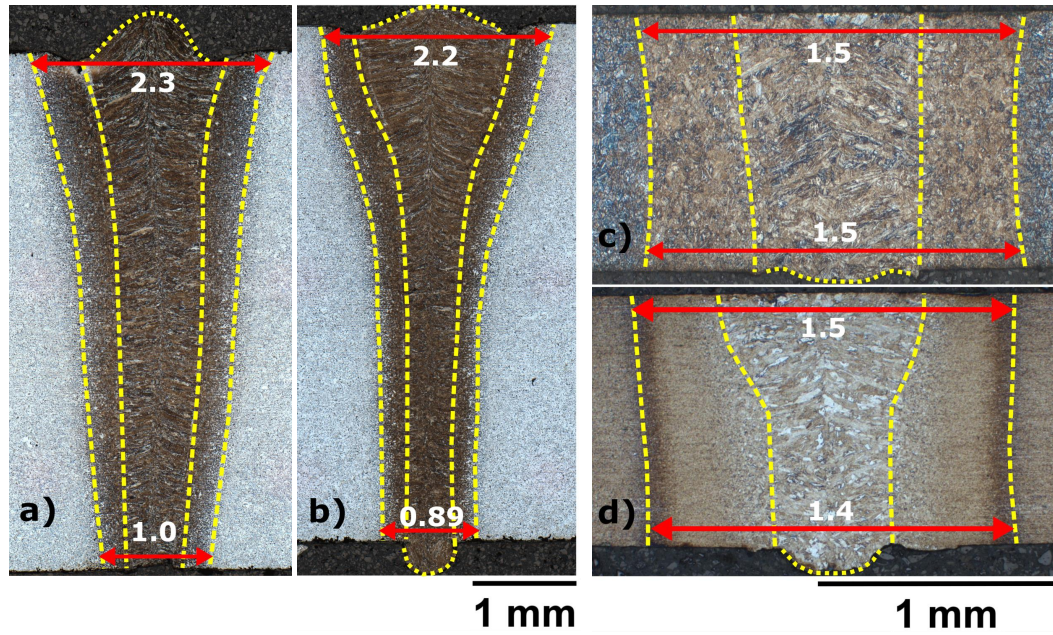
Micrographs of S235JR (a & b) and DP (c & d) steel weld joints obtained with oscillated & stationary beam welding [12]
